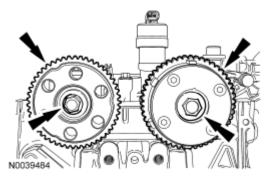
Locating Camshaft Sprockets And Bolts Courtesy of FORD MOTOR CO.
